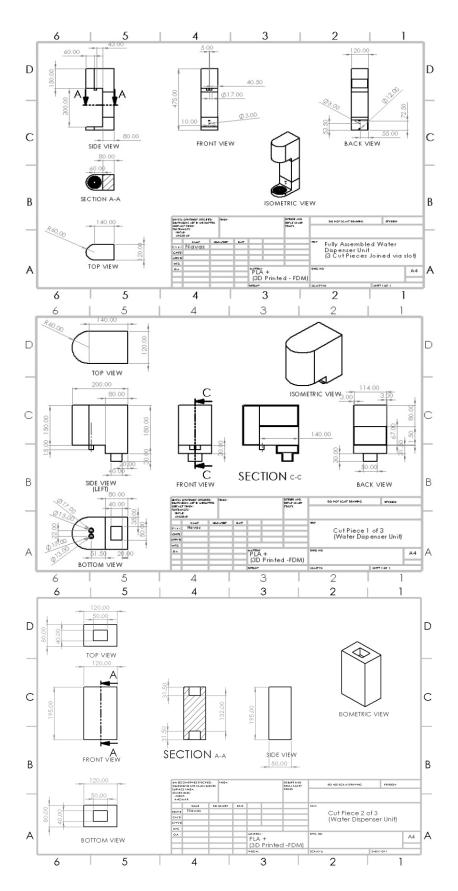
Engineering Drawings in the following order (1. Water Dispenser Unit, 2. Cut Piece 1, 3. Cut Piece 2)
